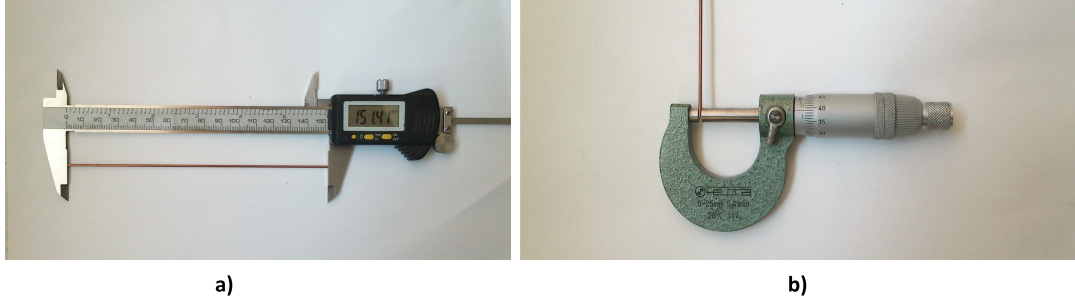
Measurements: a) electrode length with a caliper rule, b) electrode diameter with a micrometer
